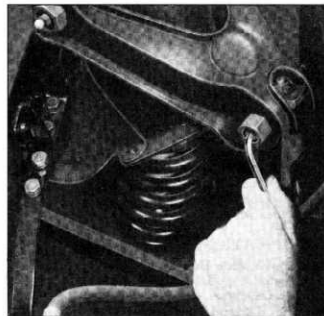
Turning Pivot Pin to Set Caster and Camber
